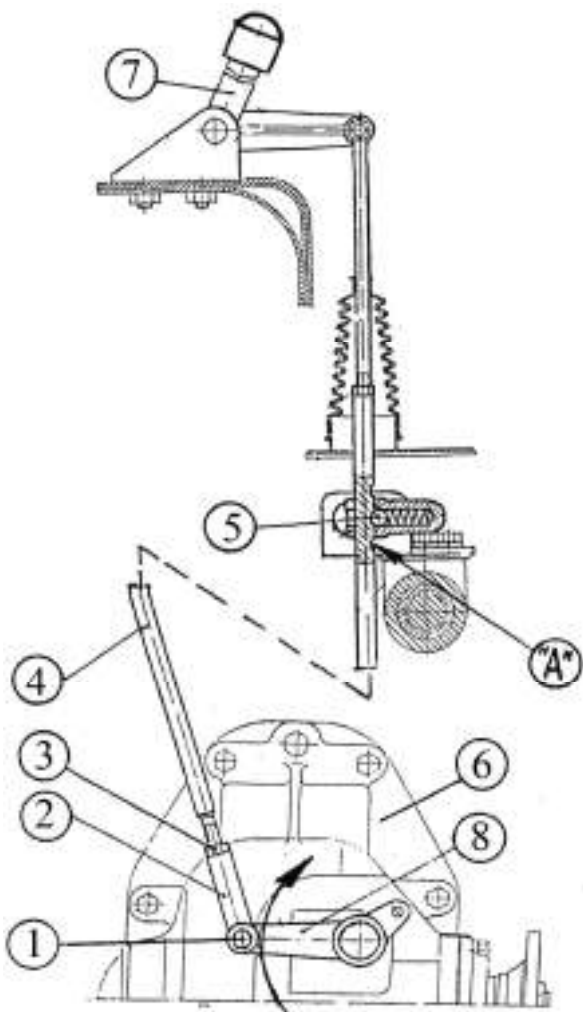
Adjusting FDA reducer turn angle
